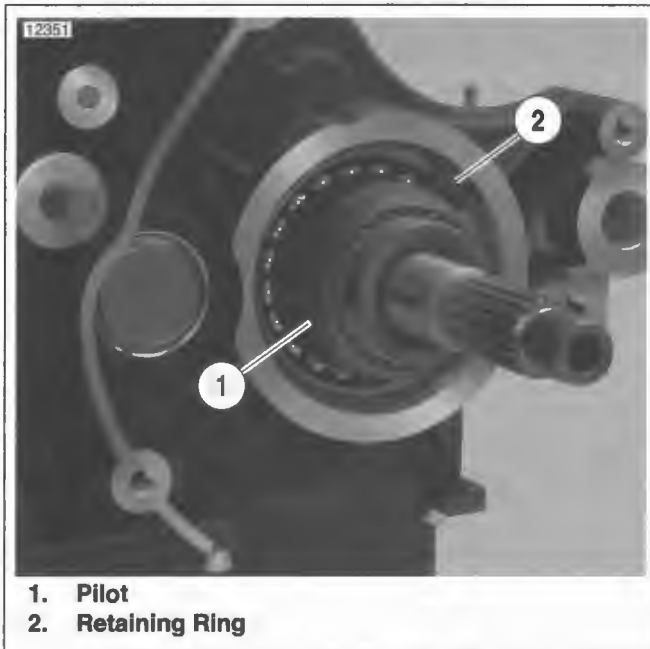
Place Main Drive Gear Seal Over Pilot
